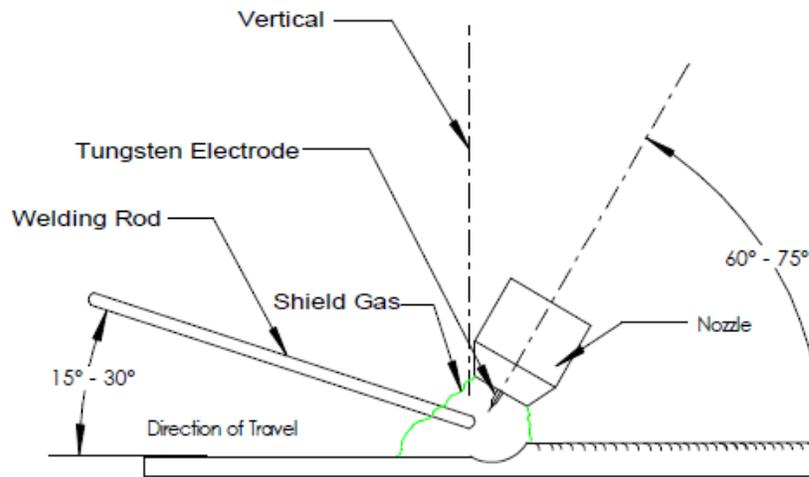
Schematic illustration of angle of torch during TIG welding [154]
